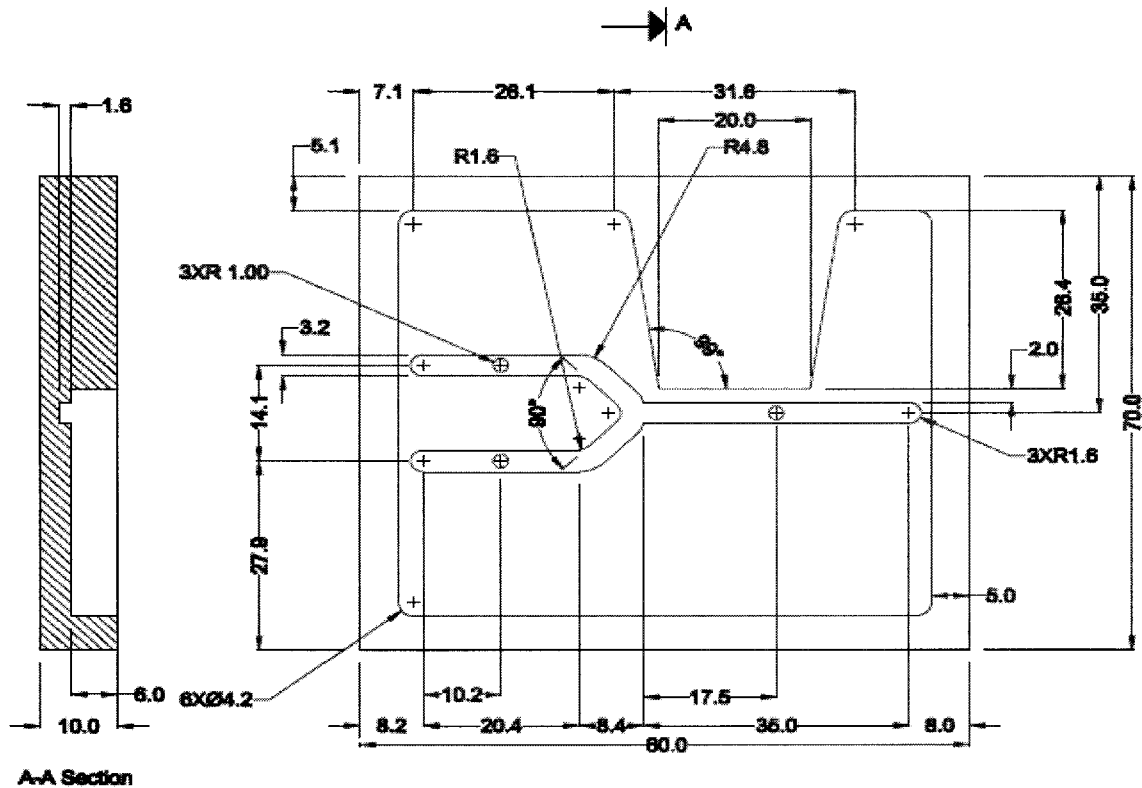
Detailed design of the mold or master (all dimensions are in mm)
